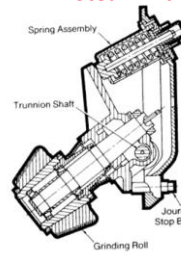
Diagram of bowl-type ring-roll mill journal.
